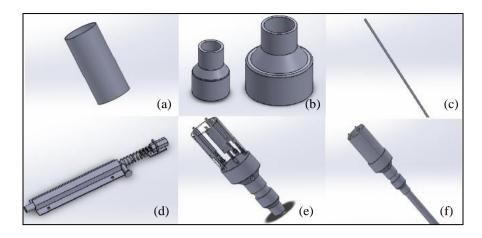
Part and assembly design by using SolidWork 2016 (a) casing; (b) Connector; (c) Pole; (d) Assembly pin and spring; (e) Assembly five Jaws; (f) complete assembly all the part.
